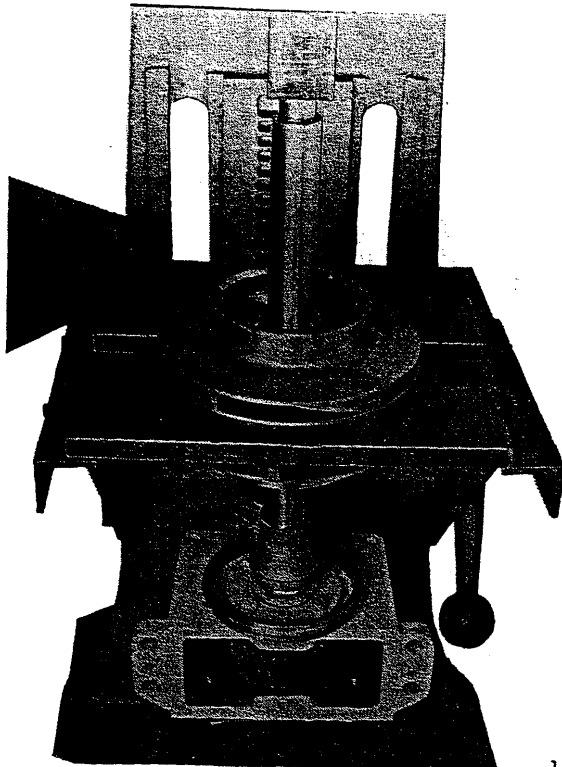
Impeller Shaft Assembly Set Up to Install Lock Rings
